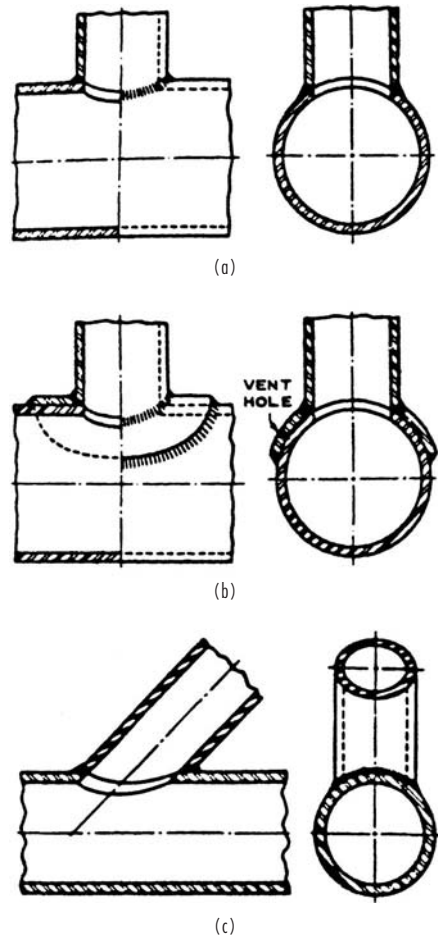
Branch welds. (a) Without added reinforcement. (b) With added reinforcement. (c) Angular branch.
